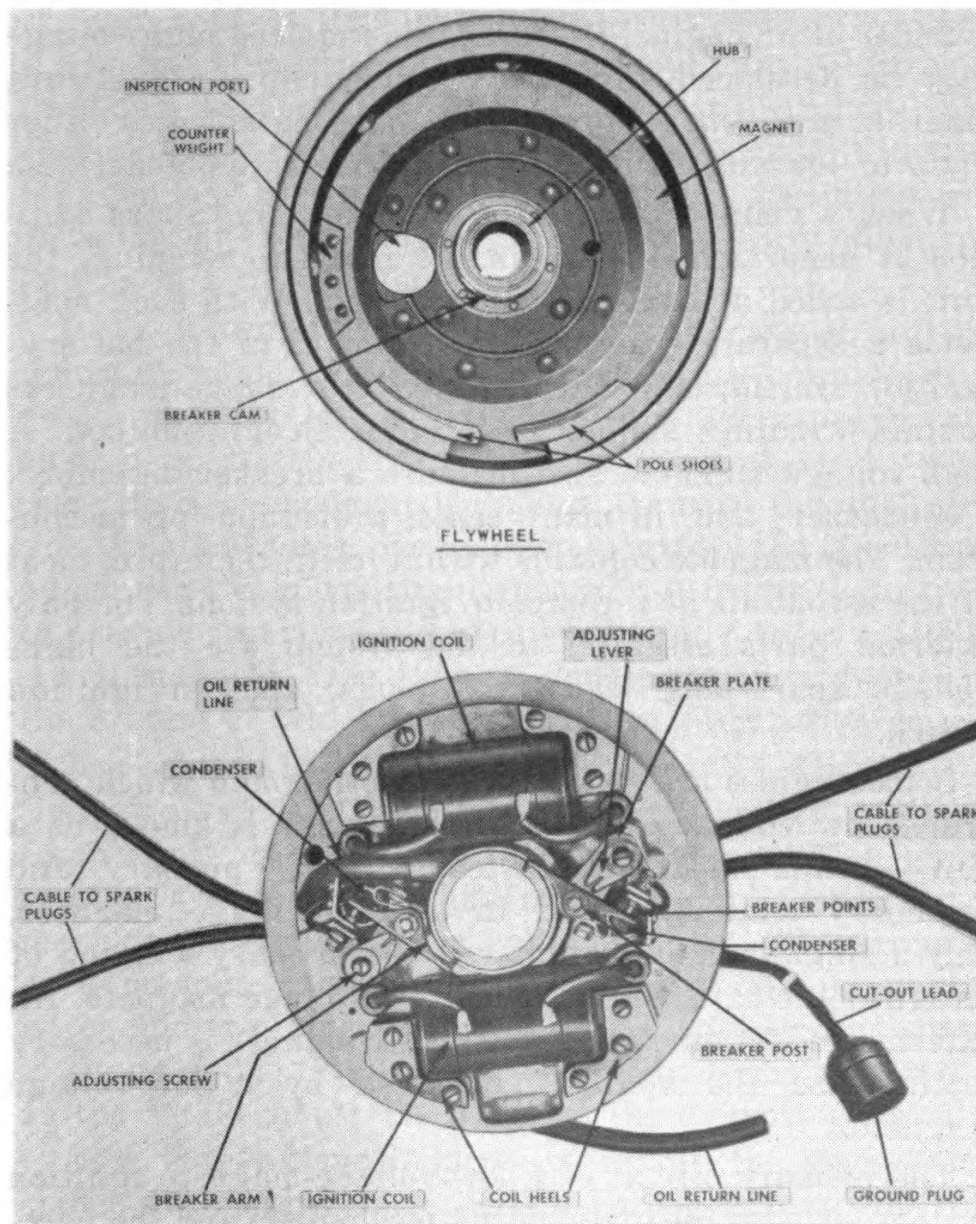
Inductor-type flywheel magneto (Johnson Motors).
